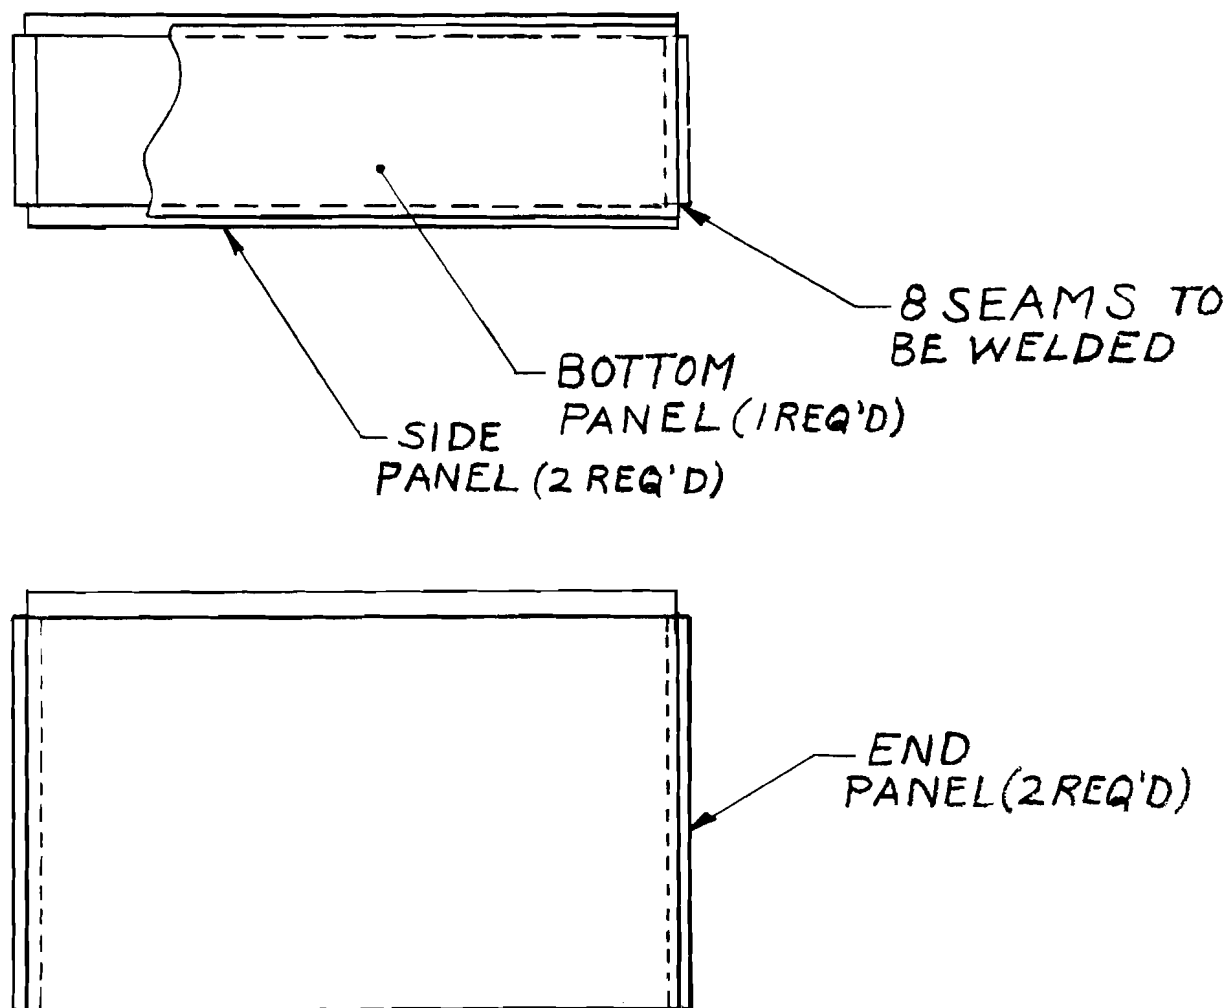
New crucible design showing overlapping seam construction for electron beam welding
